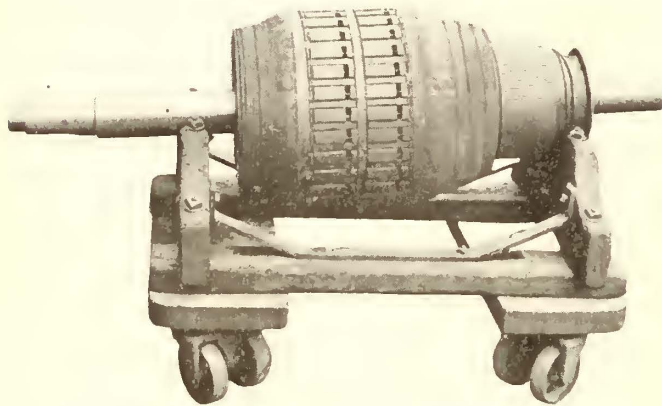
San Francisco Welding—Completed Shaft
